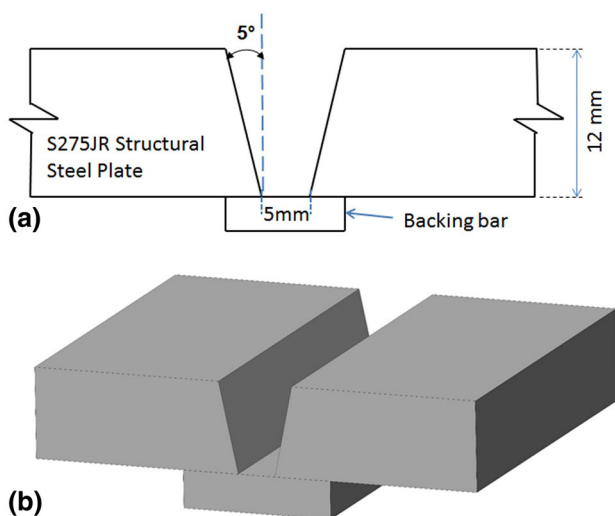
S275JR structural steel plate welding set-up (a) side view (b) 3D view
